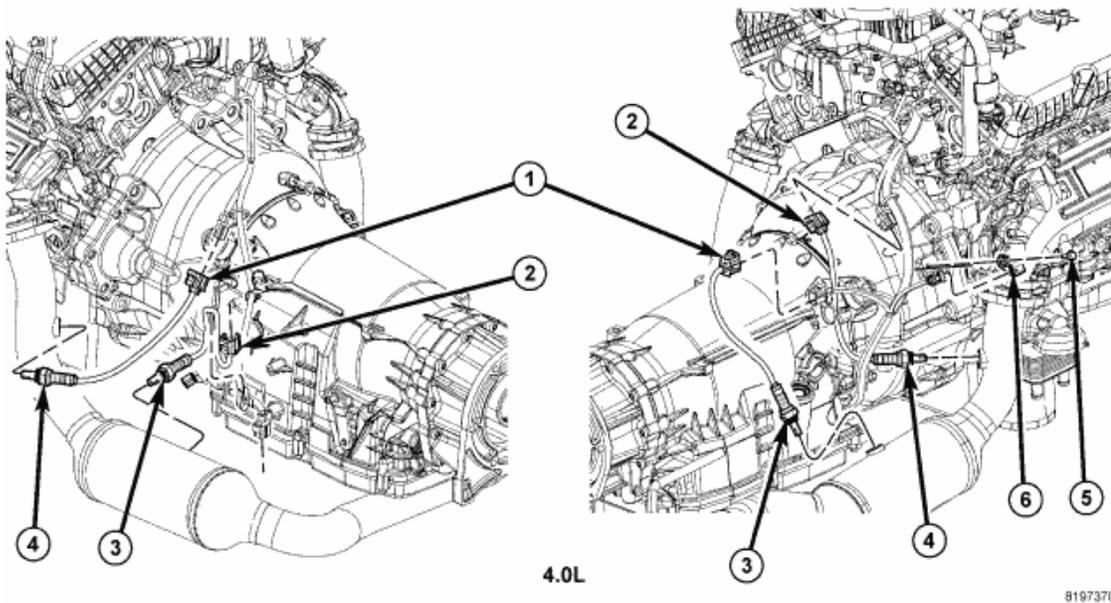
Identifying CKP/Oxygen Sensors - 4.0L
